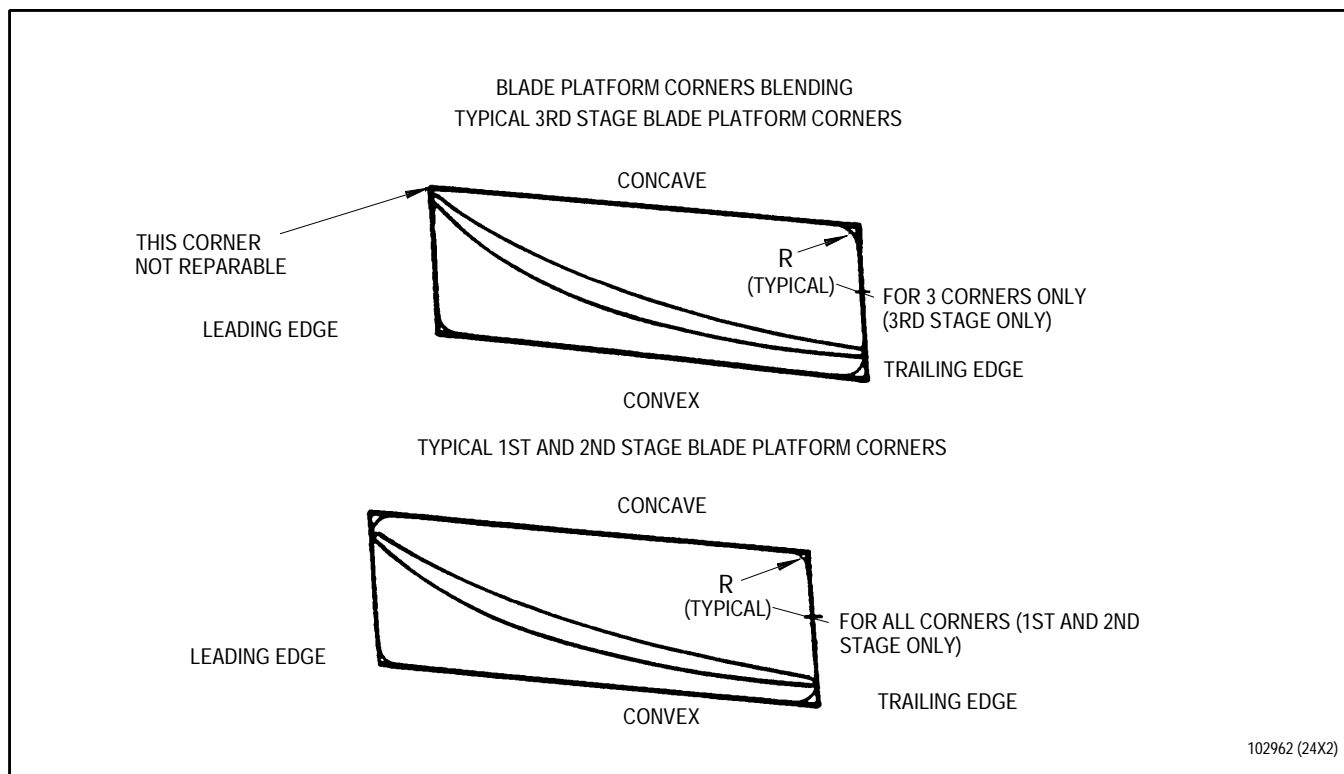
Compressor Rotor Blades - Platform Airfoil Side and Root Side Blend Repair
